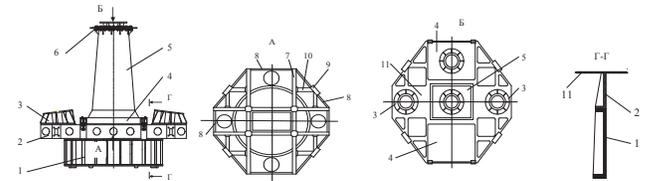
Structural Layout of Platform-type Adapter Having Minimum Weight 1 – LV attachment ring; 2 – adapter platform; 3 – SSV support bracket; 4 – turntable; 5 – upper SSV tier installation rack; 6 – damping unit; 7,8,10 – primary, secondary and supporting beams; 9 – hoist fittings; 11 – plate
